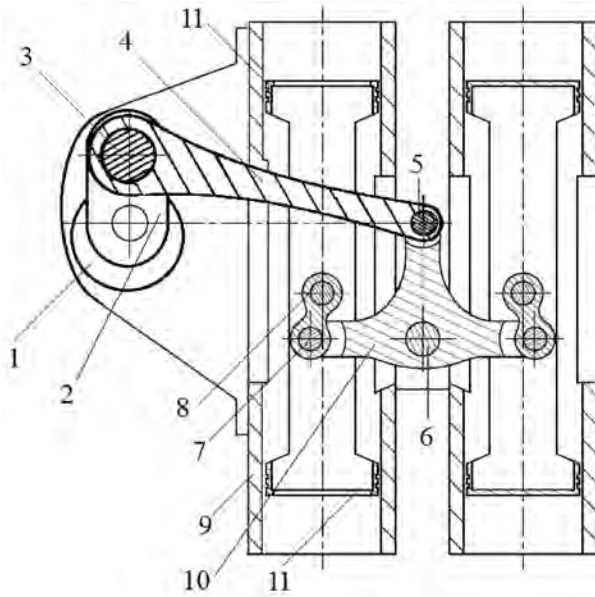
Crank and rocker piston assembly (courtesy of the author of the design)
